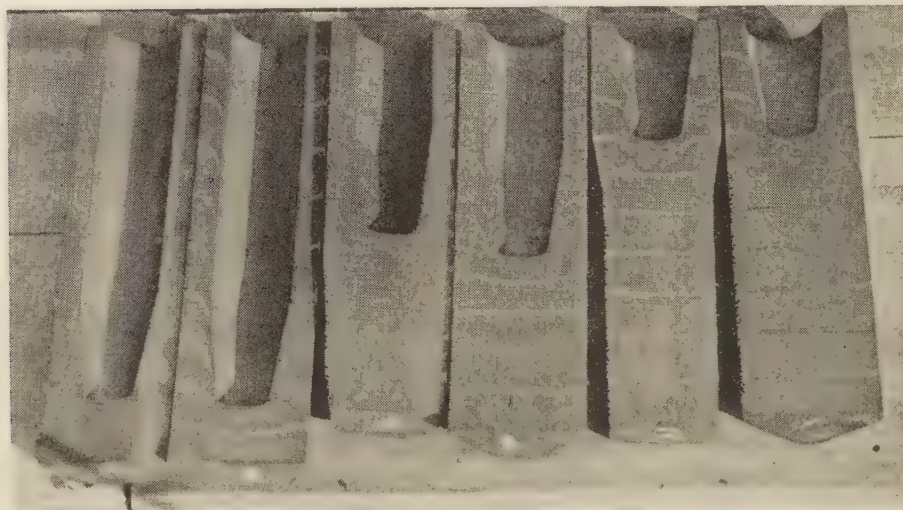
SECTIONS THROUGH SIX SPECIAL FORGINGS WITH PLUG INSERTS
